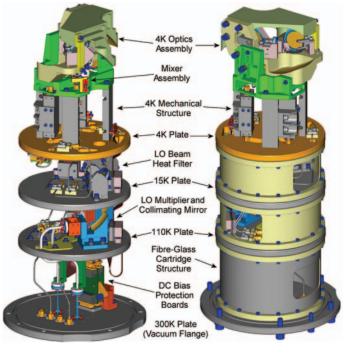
3-D drawing of the mechanical design of the Band 9 cartridge.
